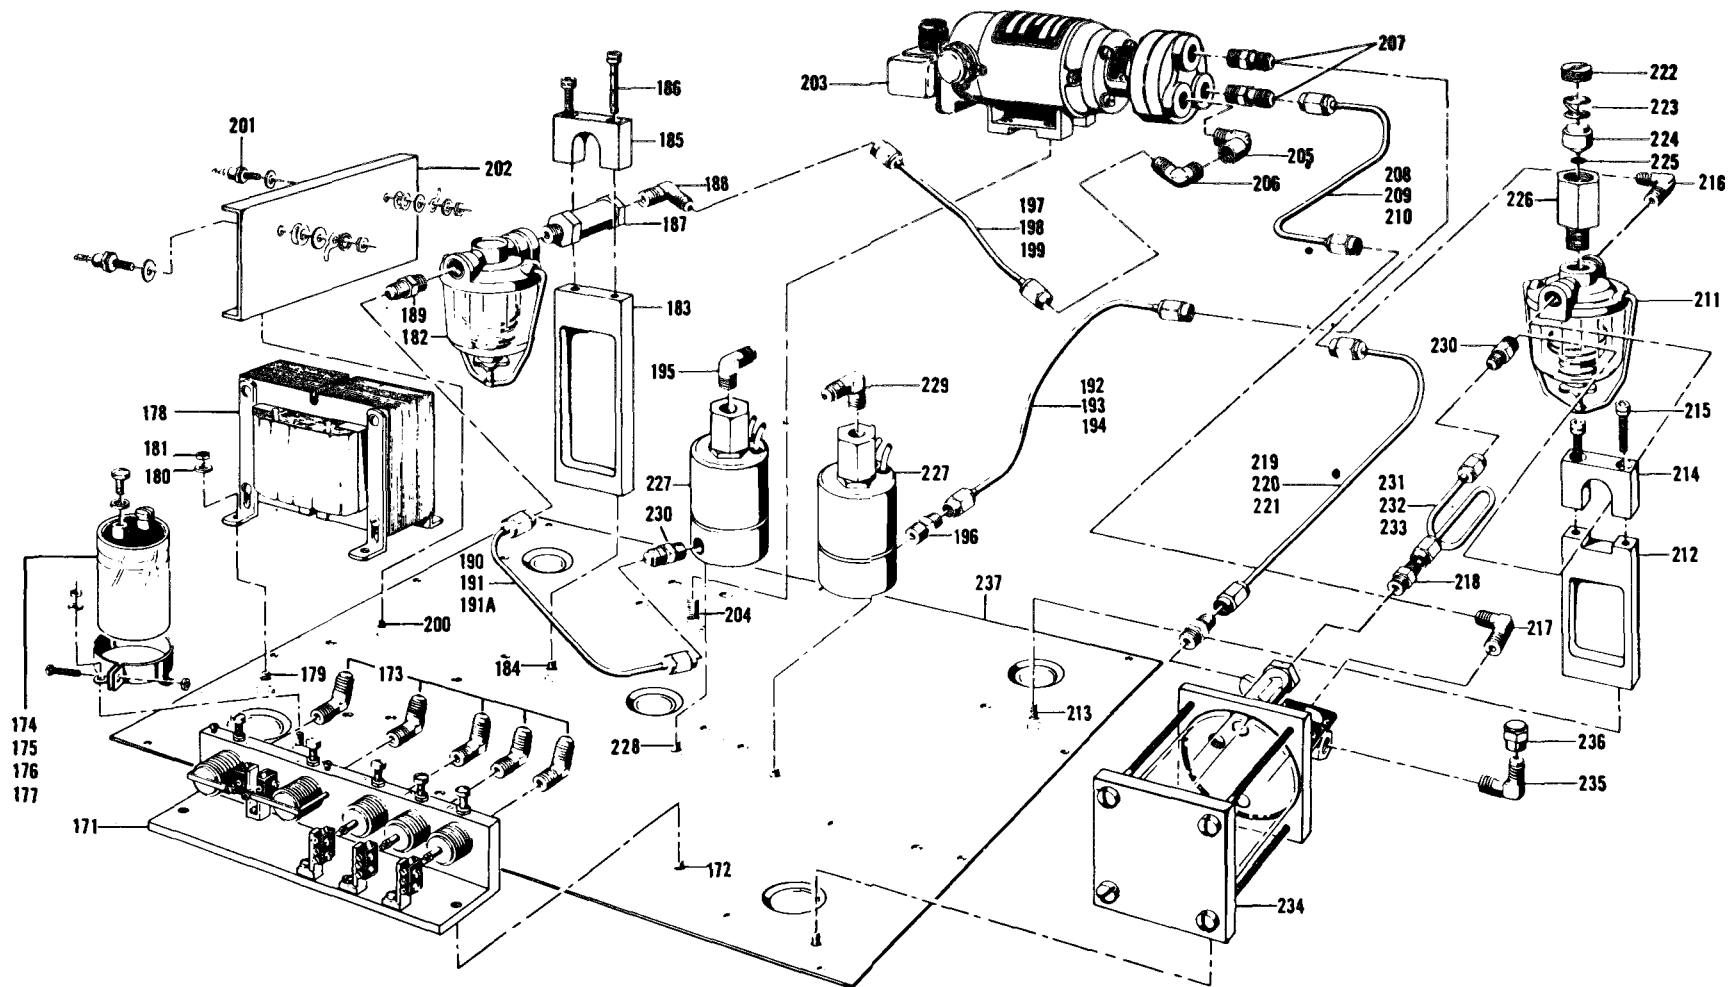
Tester Assembly (Sheet 2 of 2 Sheets)
